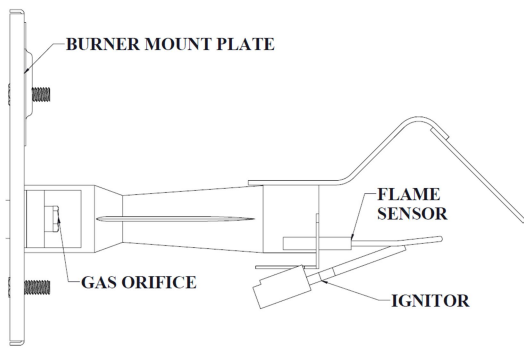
Burner Assembly, Burner Support Plate, Retaining Screws and Gas Orifices
